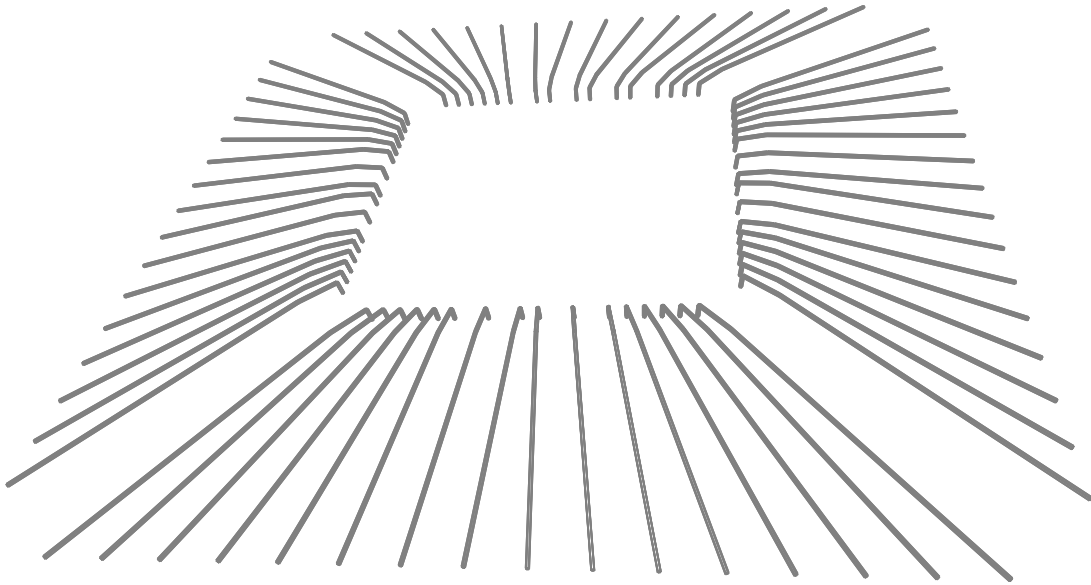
QFN 64 Three Dimensional Bond Wire Setup.
